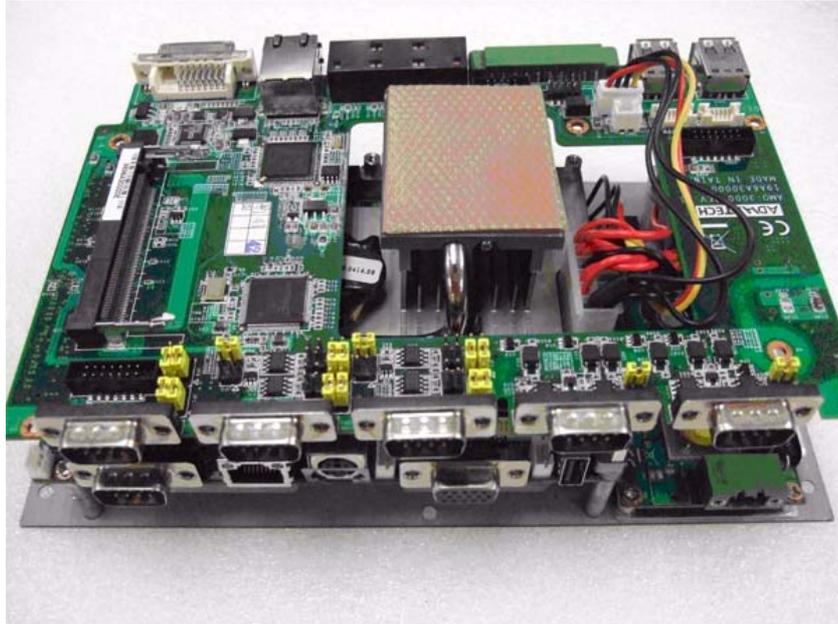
Unscrew the screw fixed AMO-3000 on MB
